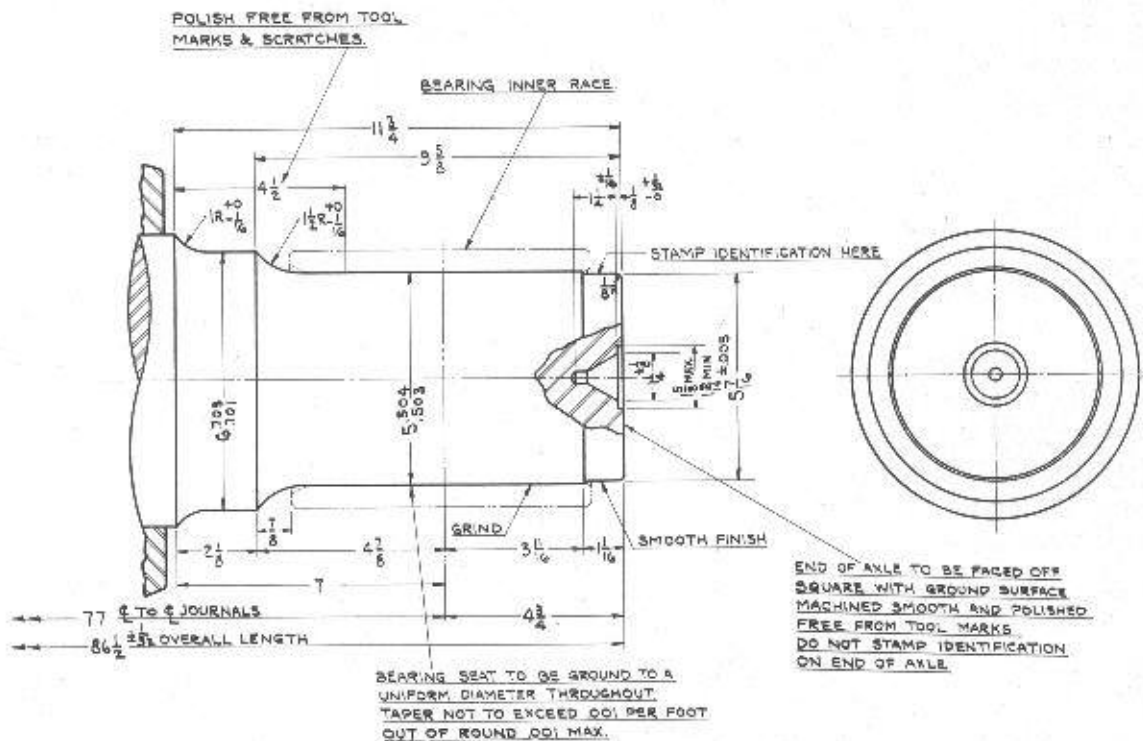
Representative axle detail drawing for type JM Journal Box.
